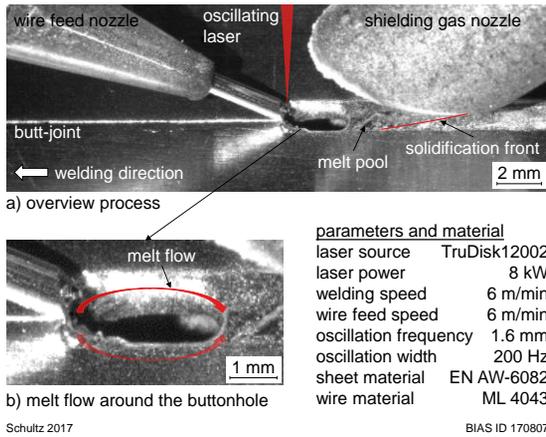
Laser beam buttonhole welding of a zero-gap butt-joint configuration
